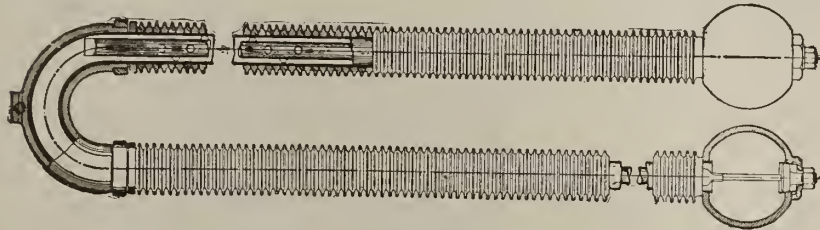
CROSS SECTION OF RETURN BEND ELEMENT AND CONNECTING HEADERS USED IN CONSTRUCTION OF FOSTER SUPERHEATERS
